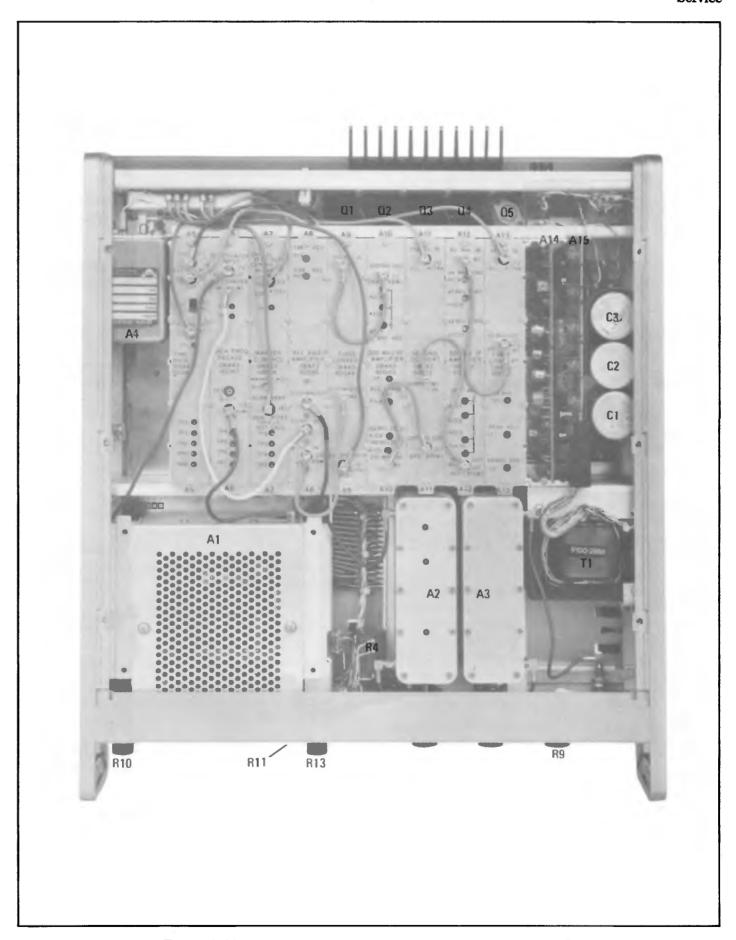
Chassis Mounted Parts and Assembly Locations
